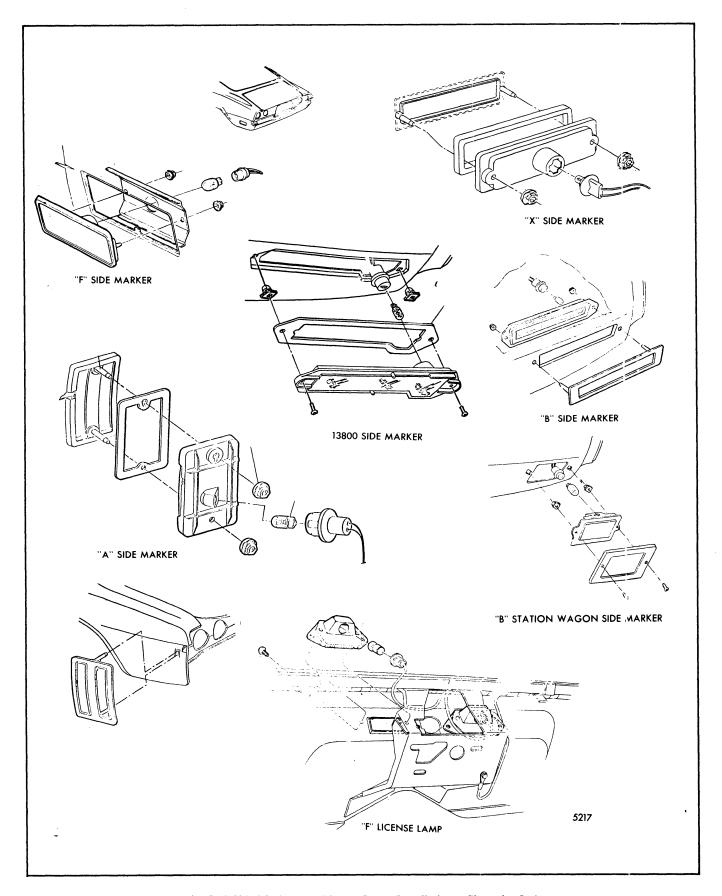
Side Marker and License Lamp Installation - Chevrolet Styles
